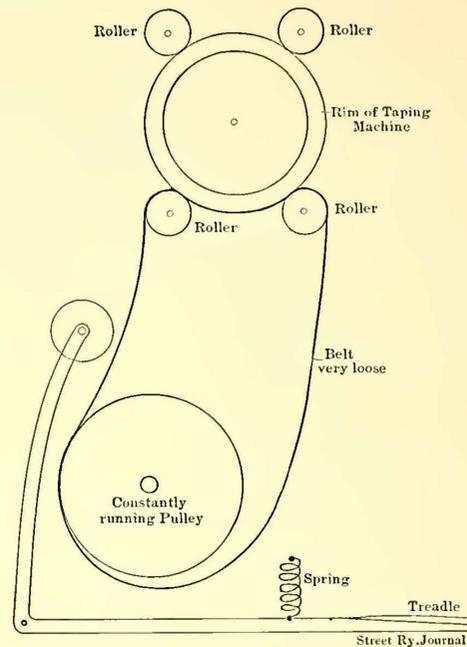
DEVICE FOR DRIVING TAPING MACHINE
